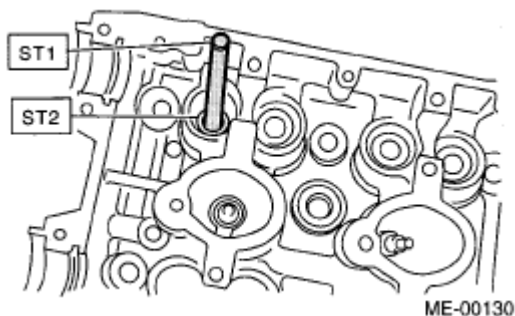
Identifying Valve Guide Remover ST1 (499767200) And Valve Guide Adjuster ST2 (18251AA020)
